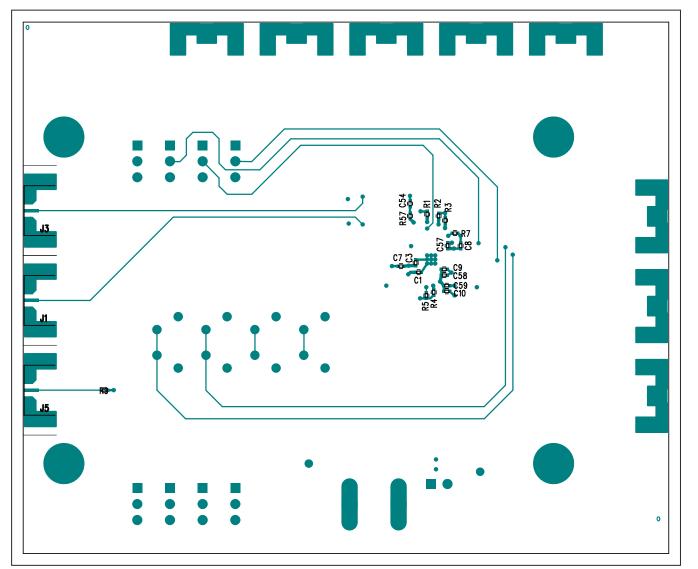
MAX3624A EV Kit Assembly Drawing—Bottom Side
